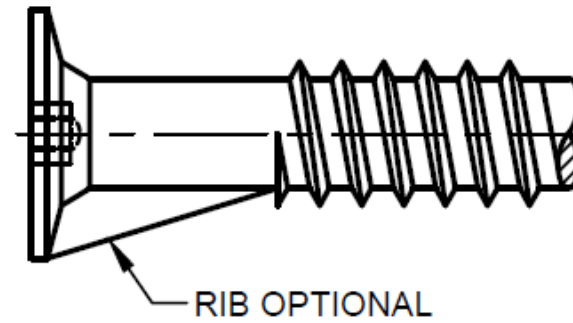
(B) HEXAGON SOCKET BUGLE HEADS (Style 2)
